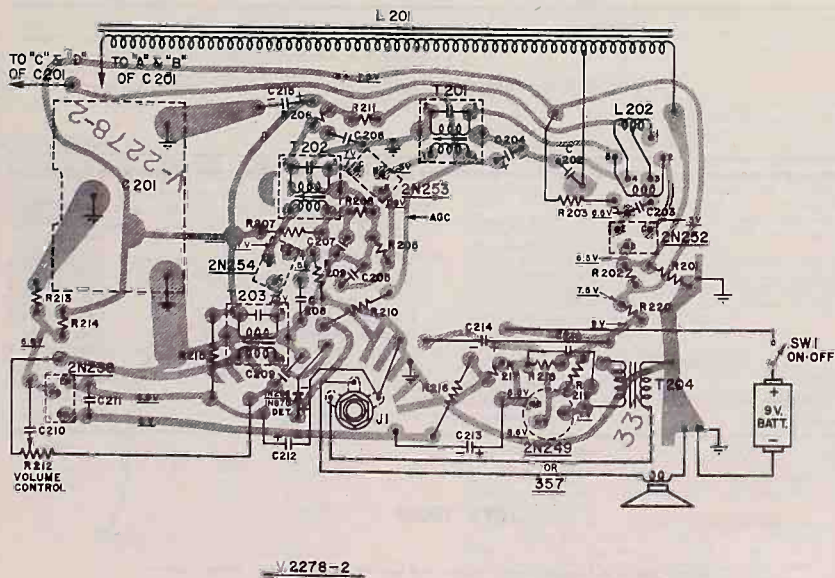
Bottom View of Printed Board Showing Top Components Symbolically
